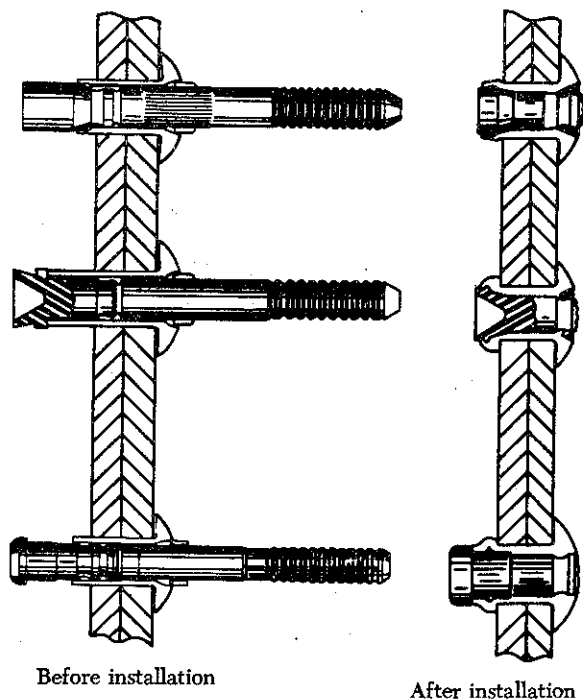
Self-plugging (mechanical lock) rivets.
